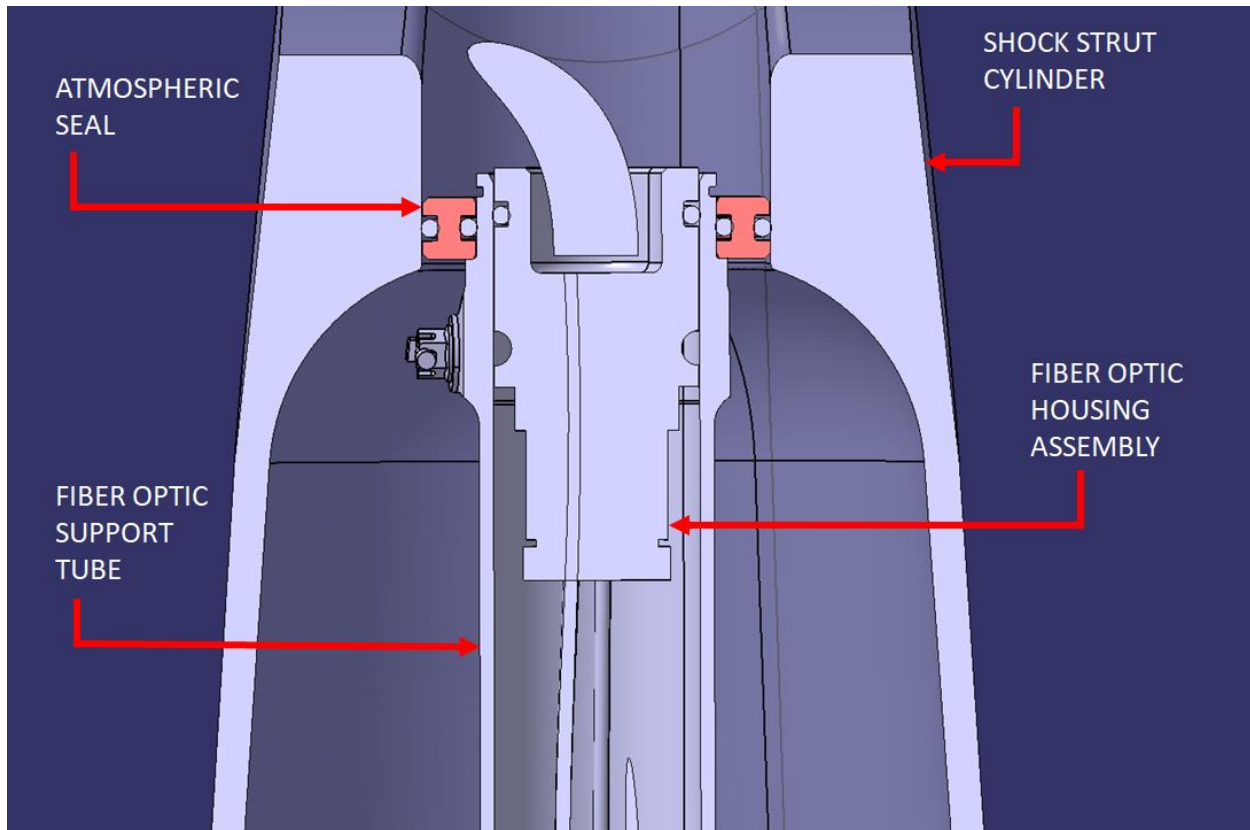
Section View of Current Fiber Optic Support Tube, Atmospheric Seal, and Fiber Optic Housing Assembly
